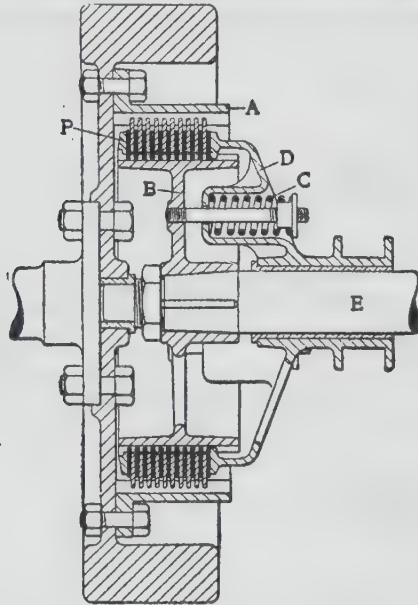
MULTIPLE SPRING TYPE OF DISC CLUTCH.
